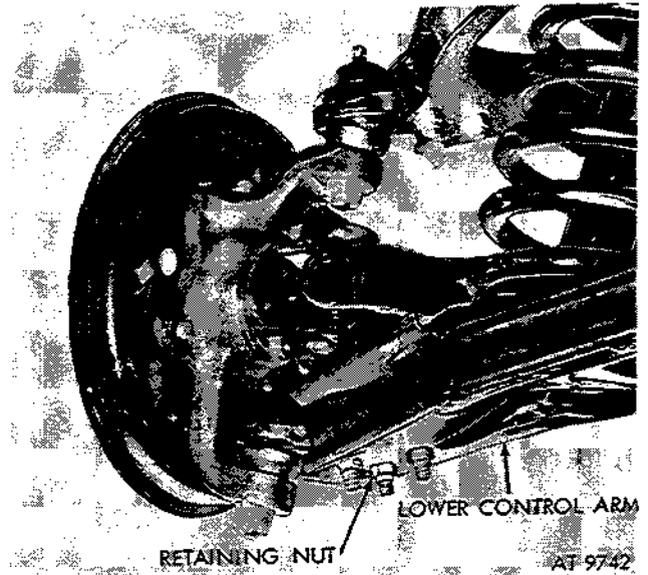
Remove retaining nuts and bolts from lower control arm.
